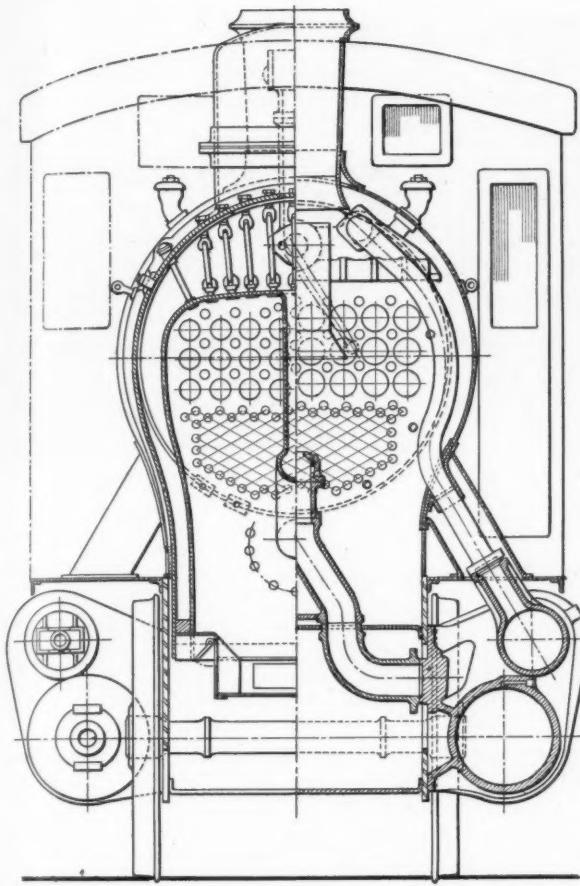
Part sectional drawing showing (left) firebox, and (right) cylinder, steamchest, and piping
